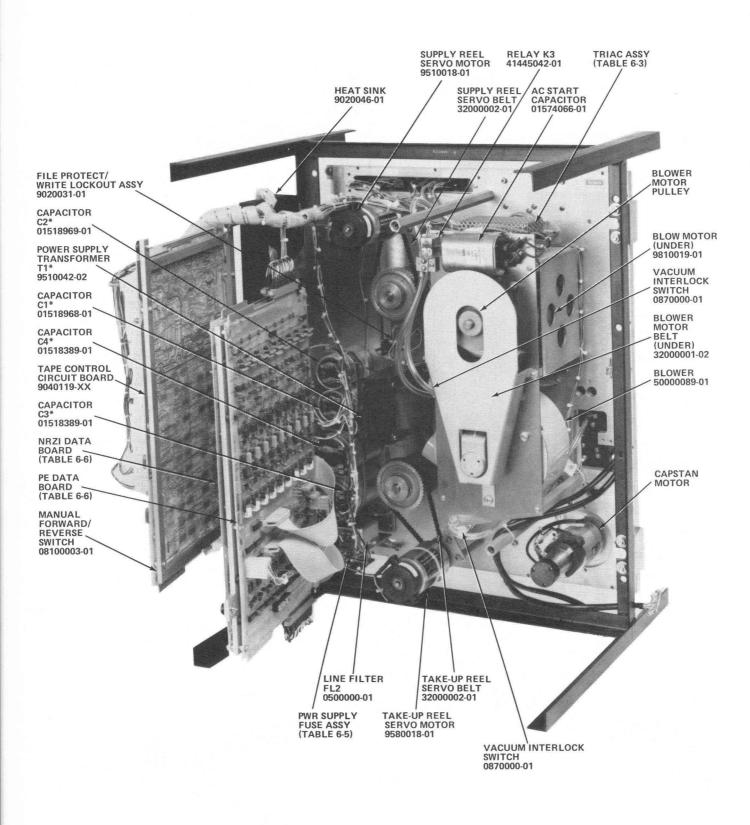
Model 2740 Tape Unit Mechanical Assembly
